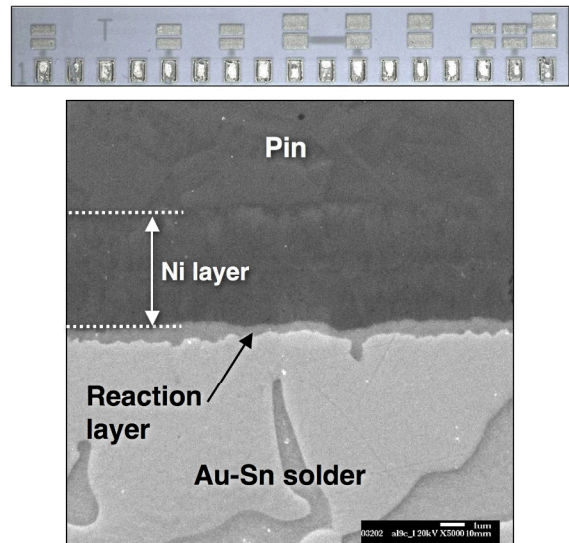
Inset stereo photograph showing the solder/pin fracture mode that predominated the case (A) pin pull tests. The SEM photograph shows the reaction layer that had formed between the Ni layer and the Au-Sn solder.
